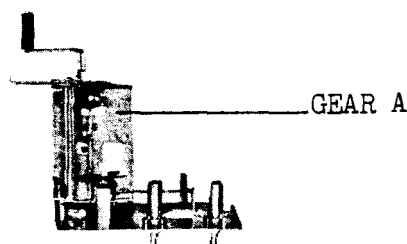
Gear Checker for Mark Ia Register Style No. 111C217G01
